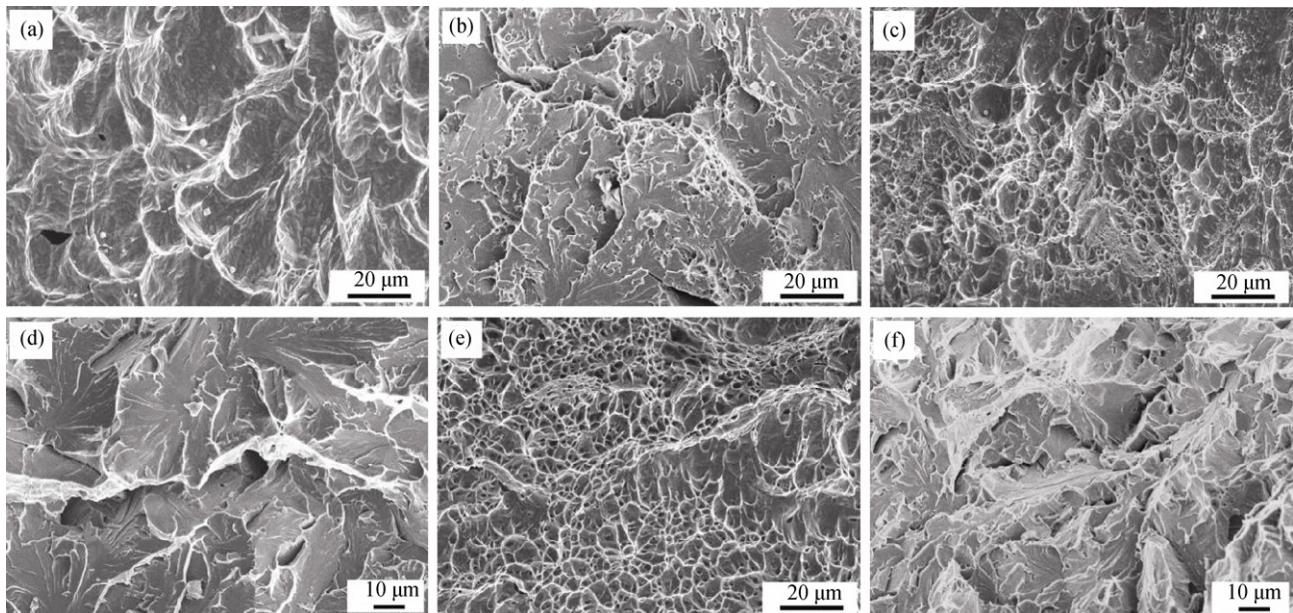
Fracture morphology of Charpy impact samples: (a) DSS base metal; (b) X70 base metal; (c) TIG weld metal; (d) X70 in HAZ by TIG; (e) MIG weld metal; (f) X70 in HAZ by MIG.
